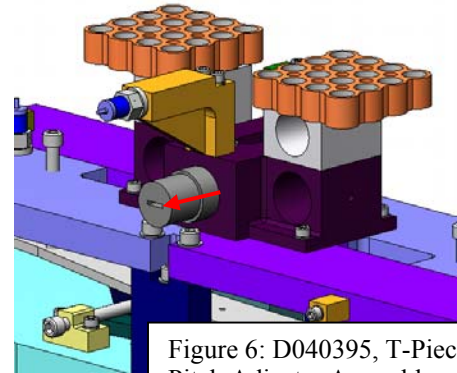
D040395, T-Piece Pitch Adjuster Assembly
